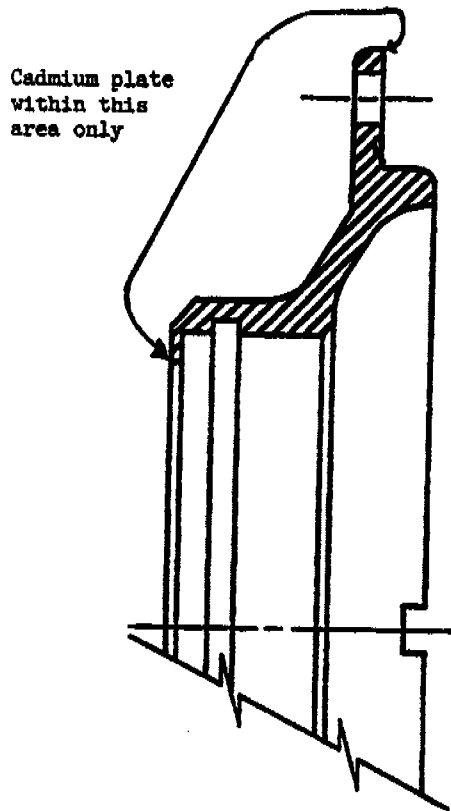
Plating Area - Oil Seal Retainer (P/N 1-030-229-06)
